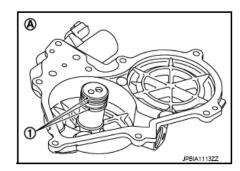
Identifying Seal Rings Courtesy of NISSAN MOTOR CO., U.S.A.
